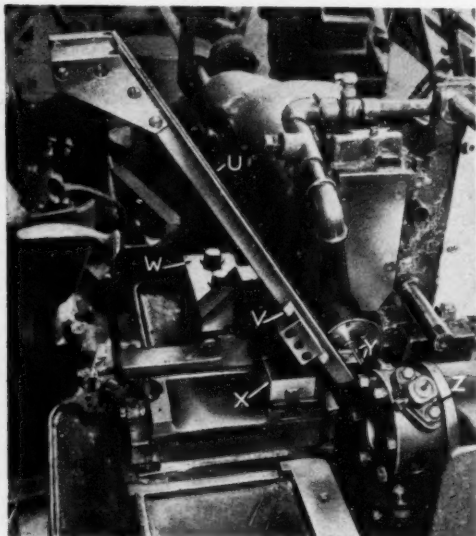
Hinge Pins are Machined in Two Stages on C.V.A. No. 8 Automatics. Partly-machined Workpieces from the First Automatic are Loaded into a Magazine Unit on the Second Machine, Here Shown. One Piece at a Time is Carried to a Position in Line with the Spindle by a Special Holder on the Front Slide
